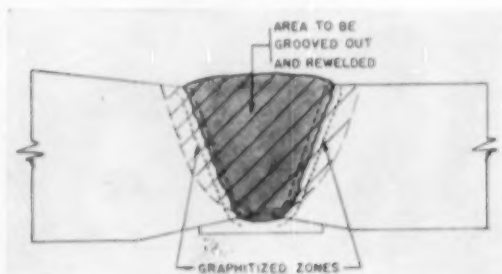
Sketch illustrating procedure for partial grooving out and rewelding of joint with graphitization on both sides of the weld
